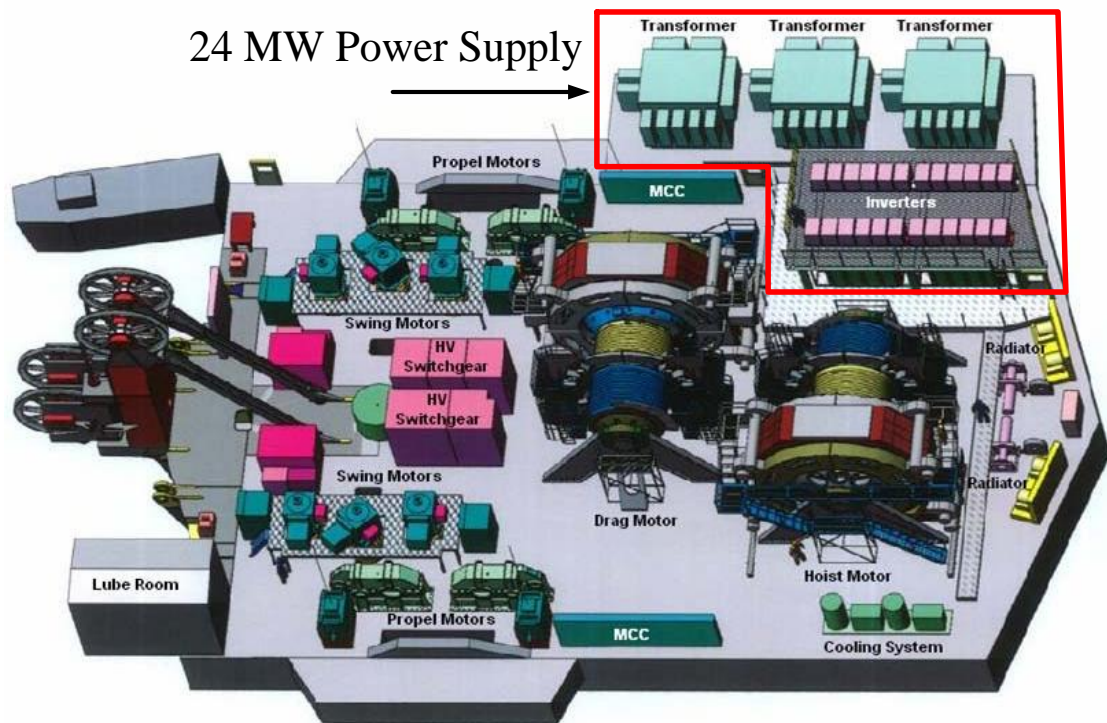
An example of a 24MW AC-drive dragline deck plan, 87.
